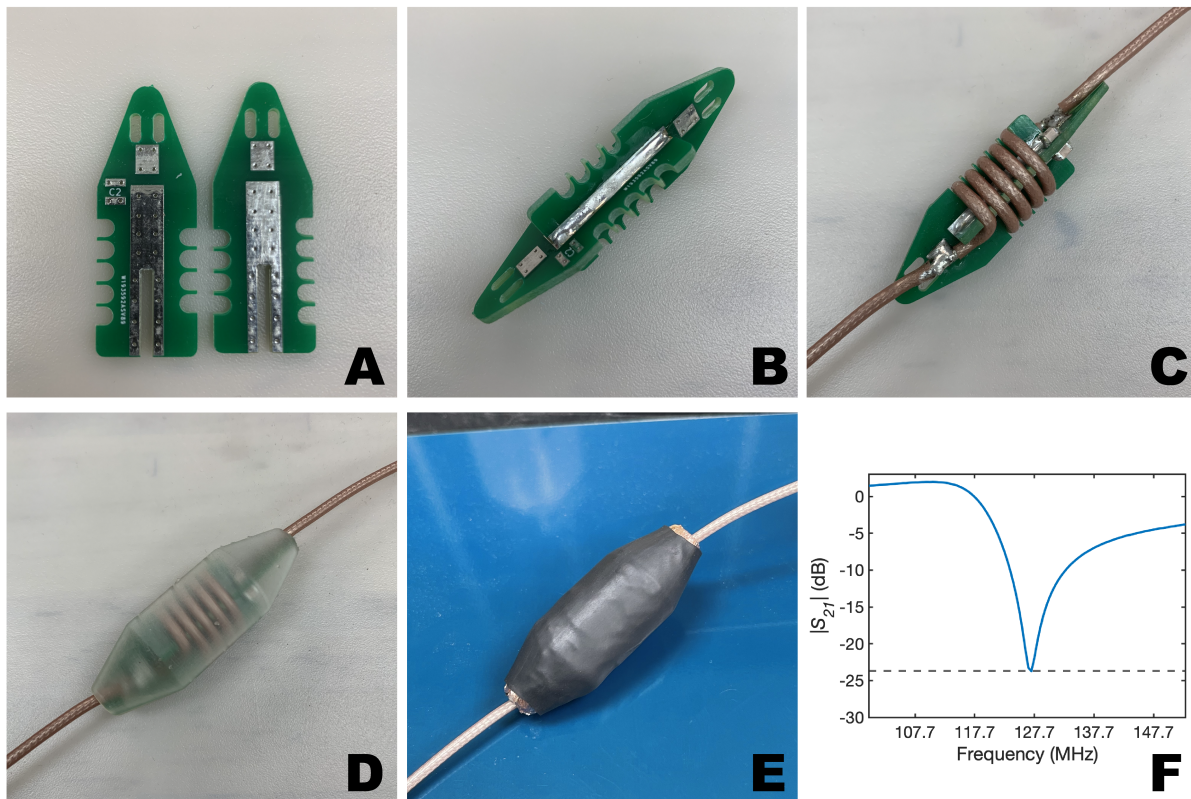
A) Pair of printed circuit boards used to form a single trap. B) The two boards soldered together to make a winding guide. C) The coaxial cable wound and attached to the board. D) The placement of the clear 3D printed shield before adding copper tape. E) Trap attached to measurement setup. F)  $S_{21}$  of a single trap.
